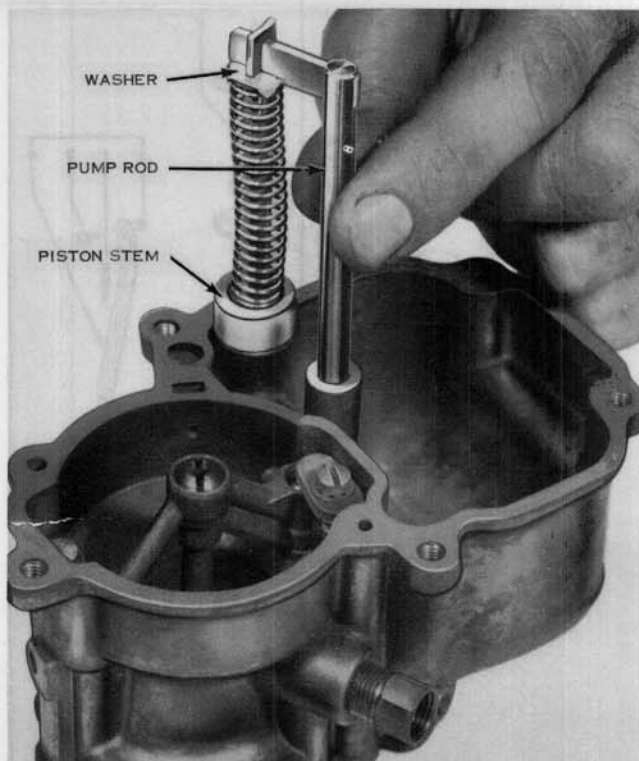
REMOVE ACCELERATING PUMP ASSEMBLY
